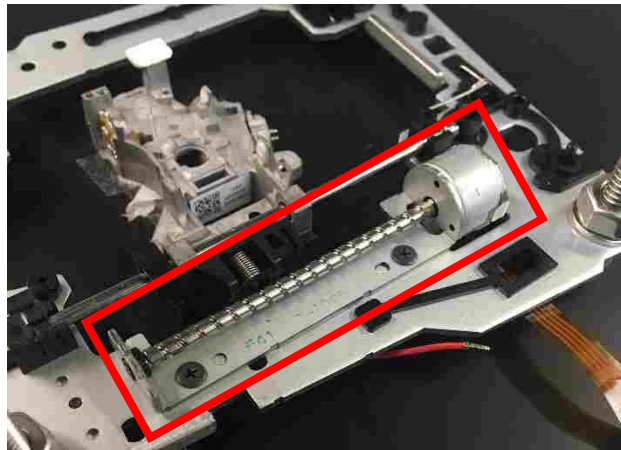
Motor included in the Xbox assembly for moving the PHR laser assembly over a disc
